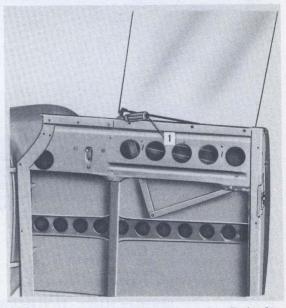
Door Glass Wedged in Raised Position for Removal of Door Lock and Remote Control Assembly.
